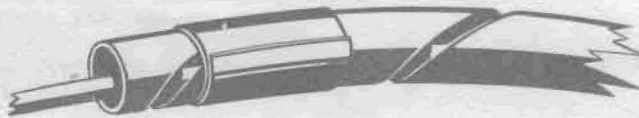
LIGHT TYPE VIBRATING DAMPER FITTED WITH ADHESIVE TAPE.
